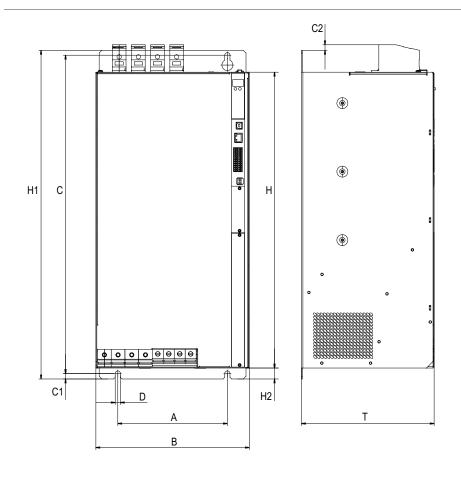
Dimensional drawing, housing with air cooling, schematic depiction for BG6/6a
